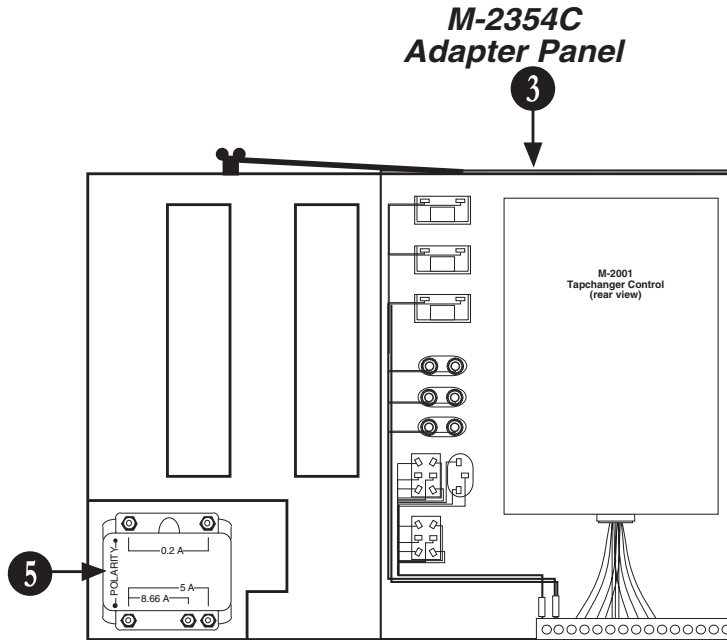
M-2354C Adapter Panel and M-2001 Tapchanger Control in Cabinet
